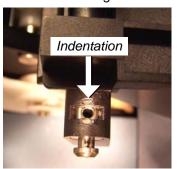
Proper Setting for Gap Cam Lockscrew
